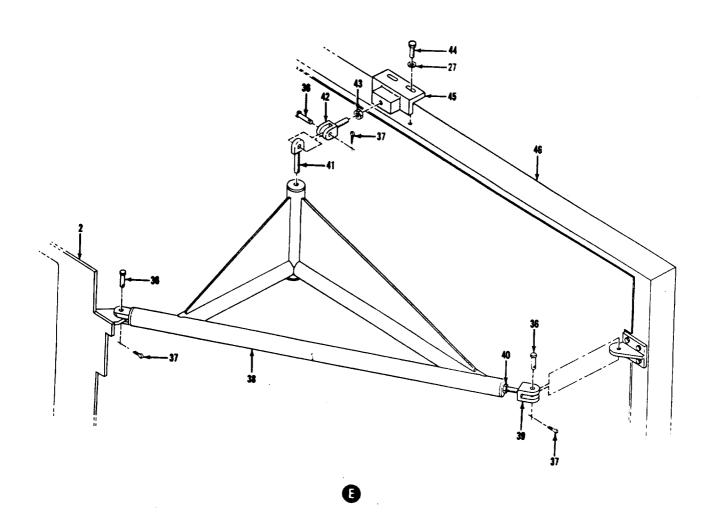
Extension Platform Assembly (Sheet 4 of 13)
